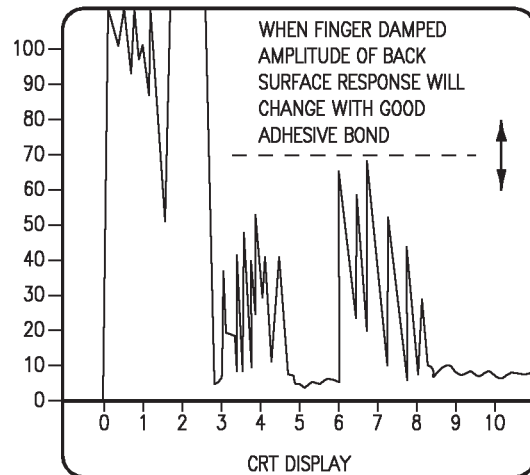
Ultrasonic Inspection of Bonded Aluminum Doublers Using C-398 Ultrasonic Flaw Detector (Sheet 1)
